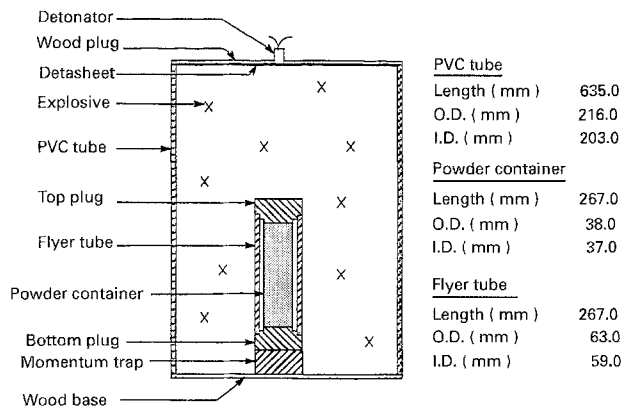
Cylindrical axisymmetric double-tube system and its experimental dimensions for cylindrical geometry.
